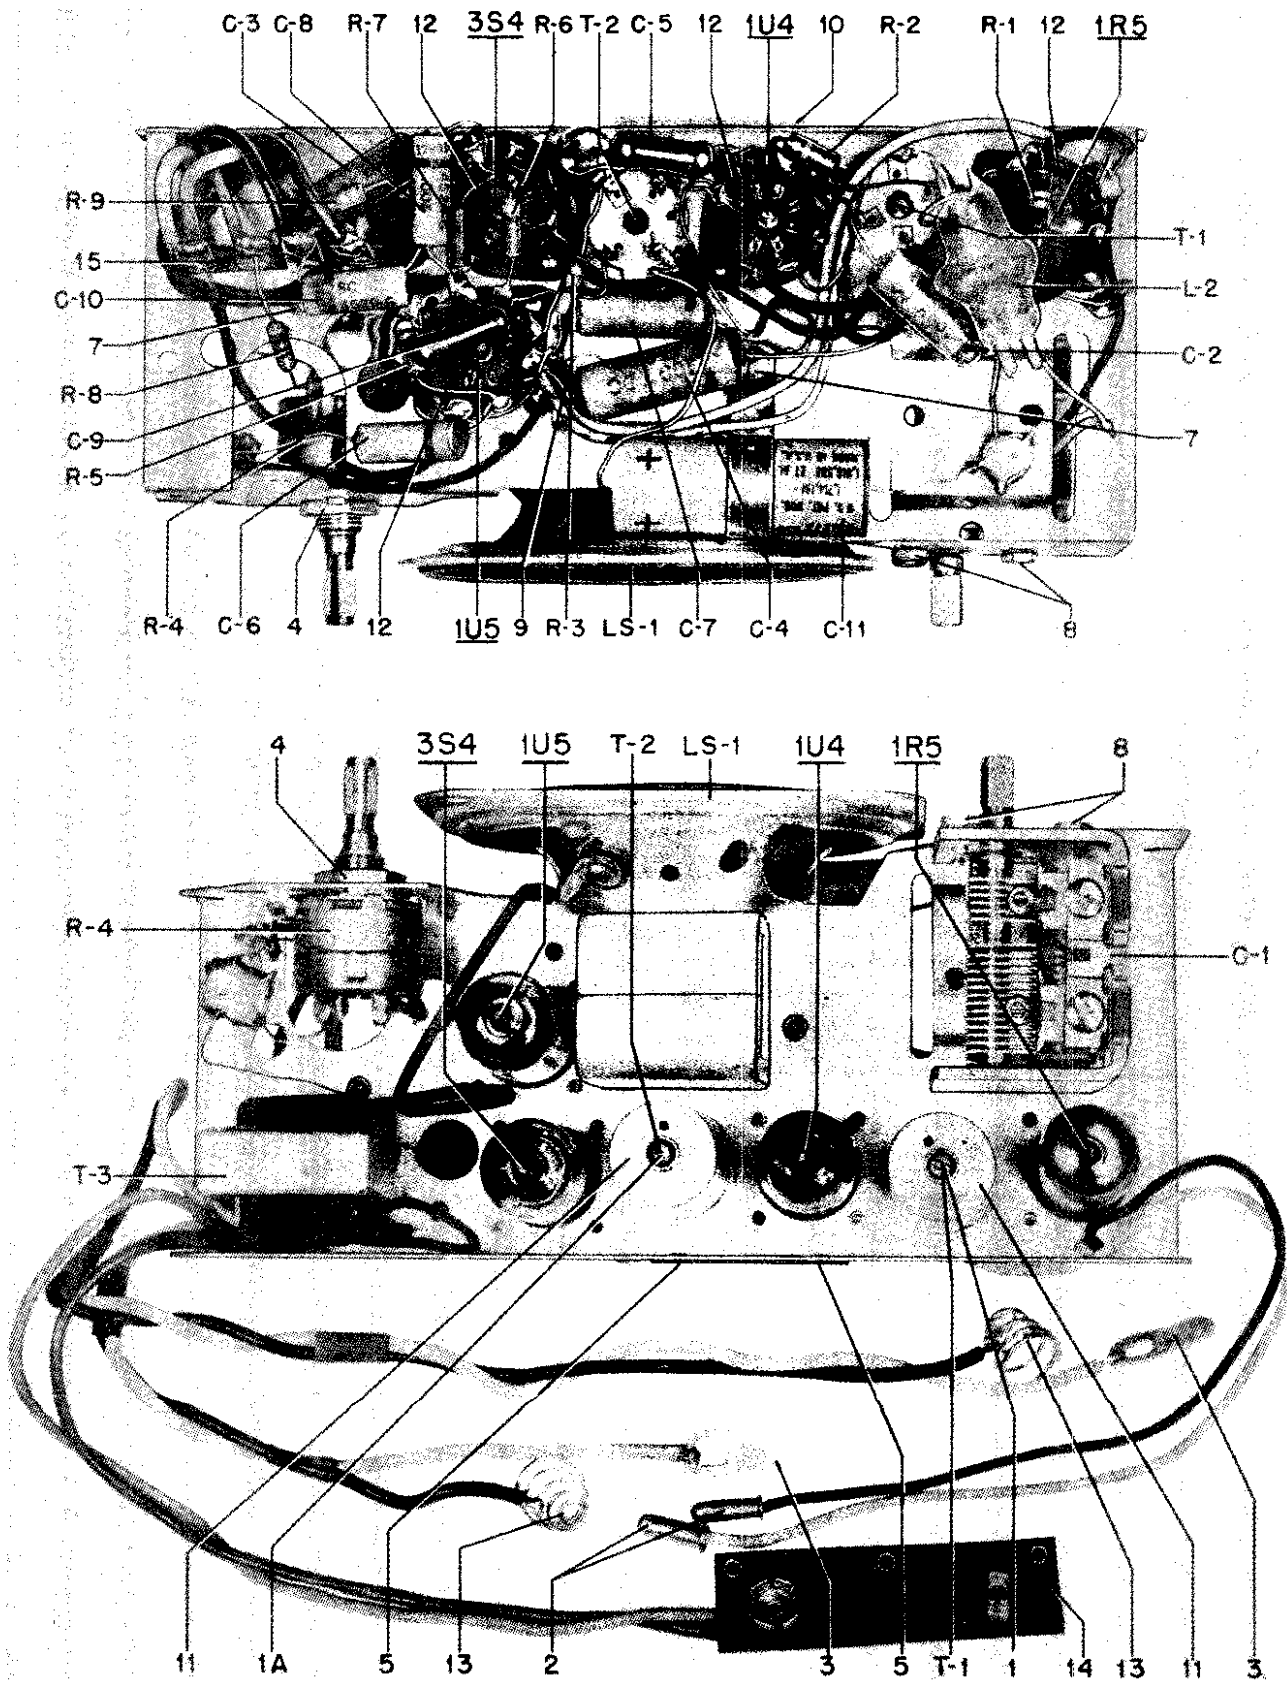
PARTS LOCATION - CHASSIS TOP & BOTTOM
